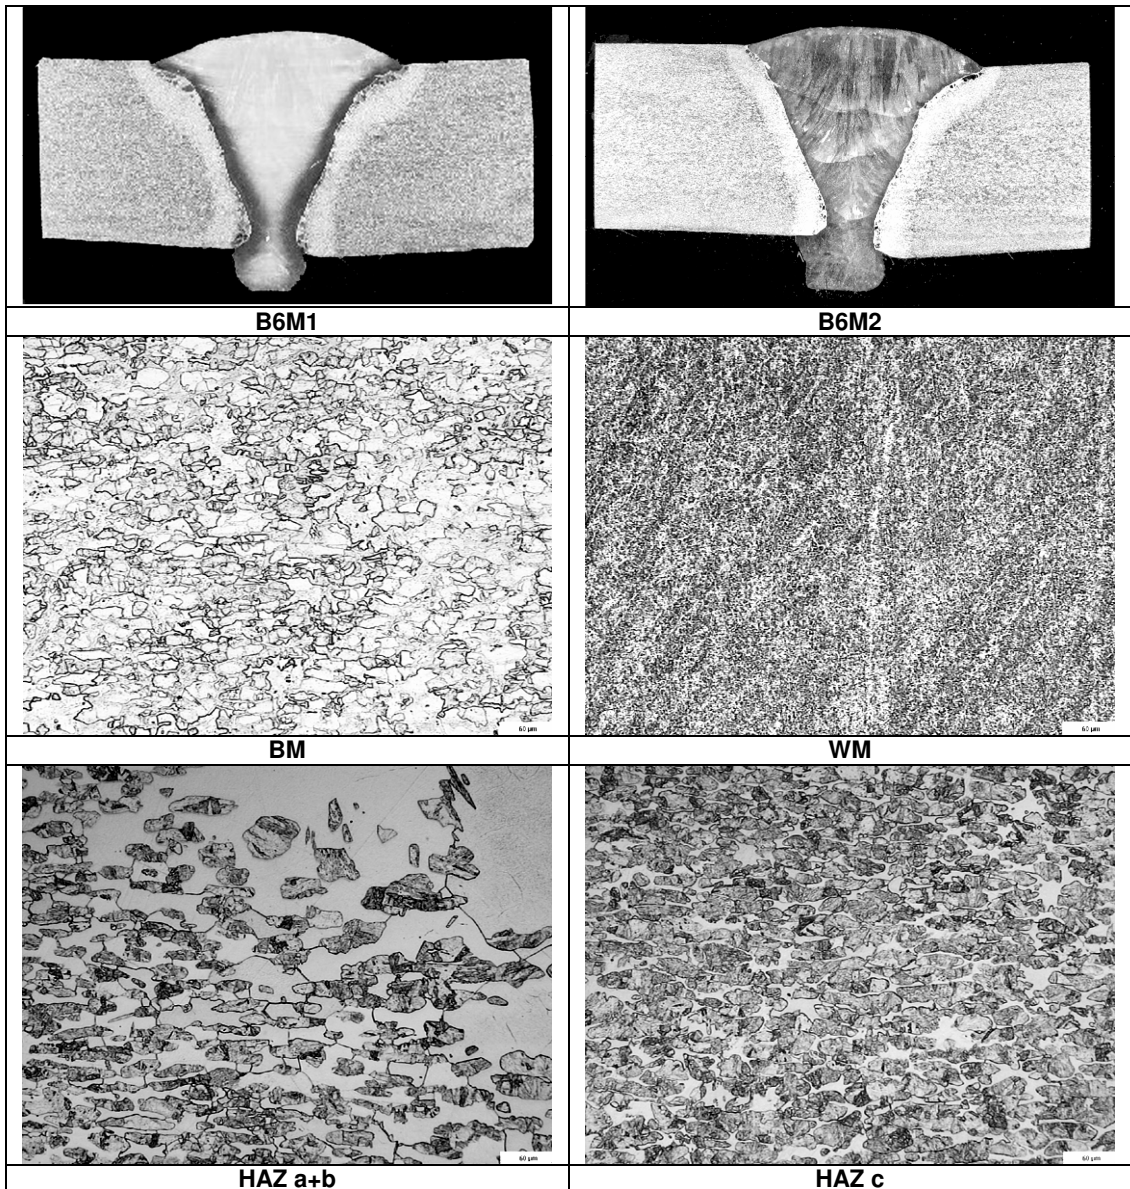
Macro and microphotographs of 12 mm thick GMAW weld with 306 type of consumables (B6).
